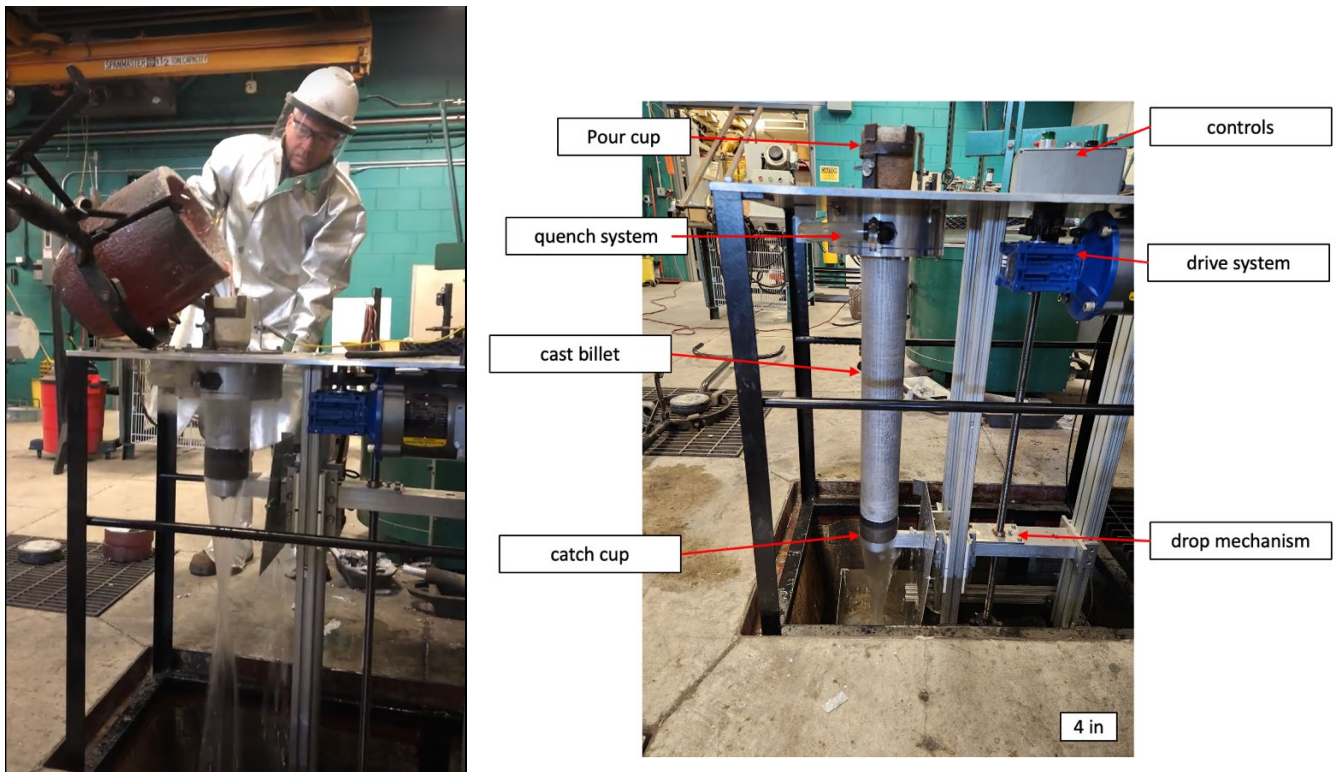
Direct chill casting in which molten aluminum is poured in the top (left), and then solidified into a cylinder by forming an exterior skin in a water-cooled metal mold (under pour cup) and then further solidified by water running over the exterior of the billet as it is lowered (seen on left). Billet is 30" long & 3.5" in diameter.
